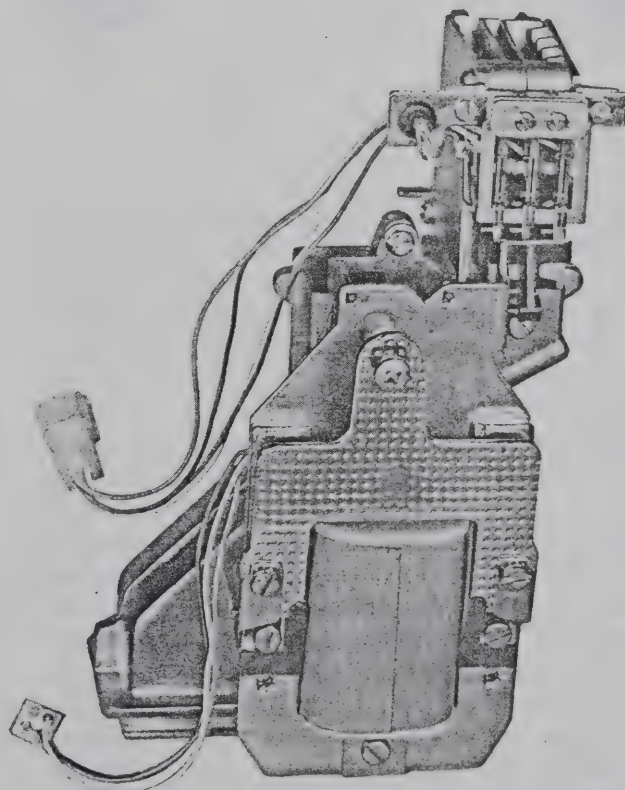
Coin Relay-Hopper and Coin Chute Assembly.
